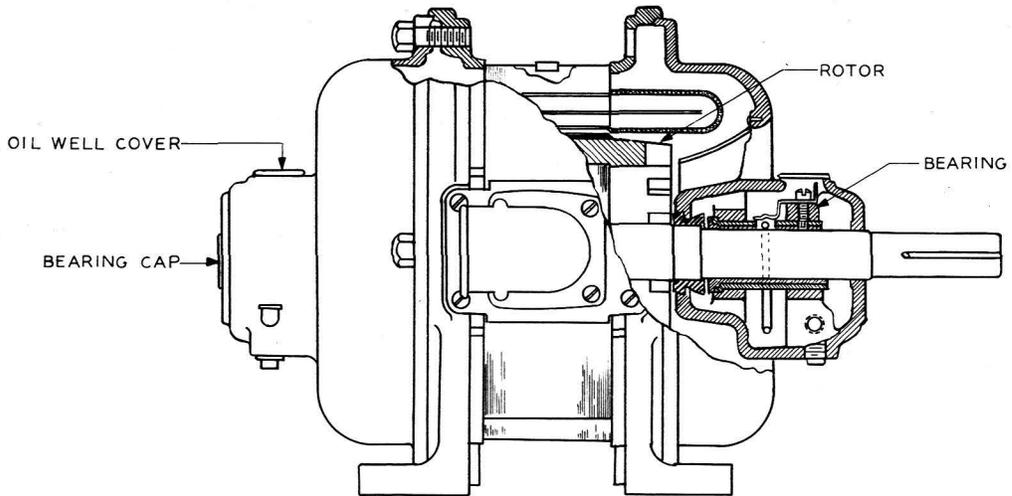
Sectional View of Typical Motor With Oil-Ring-Type Bearings
